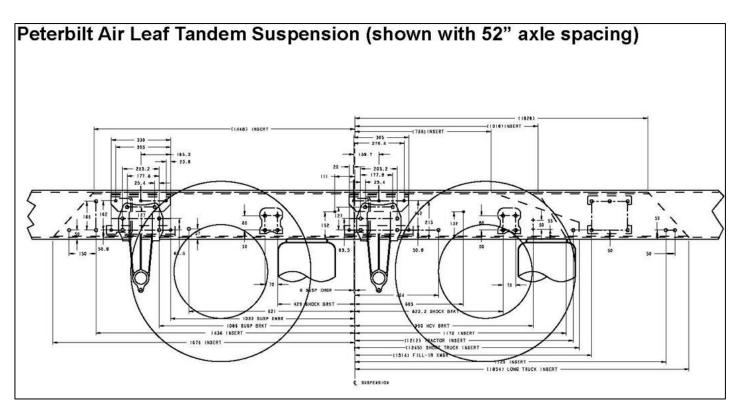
Peterbilt Air Leaf Tandem Frame Drilling (Dimensions In Millimeters)
